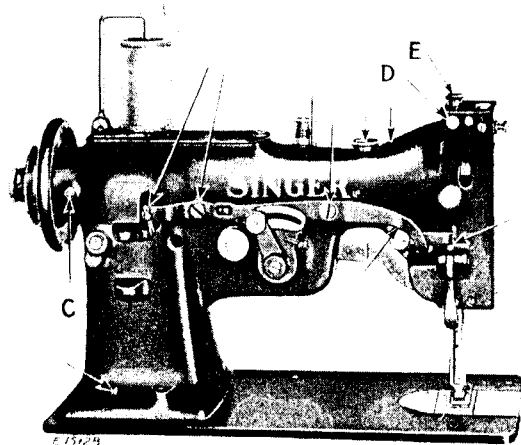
Oiling Points and Adjustments at Rear of Machine
